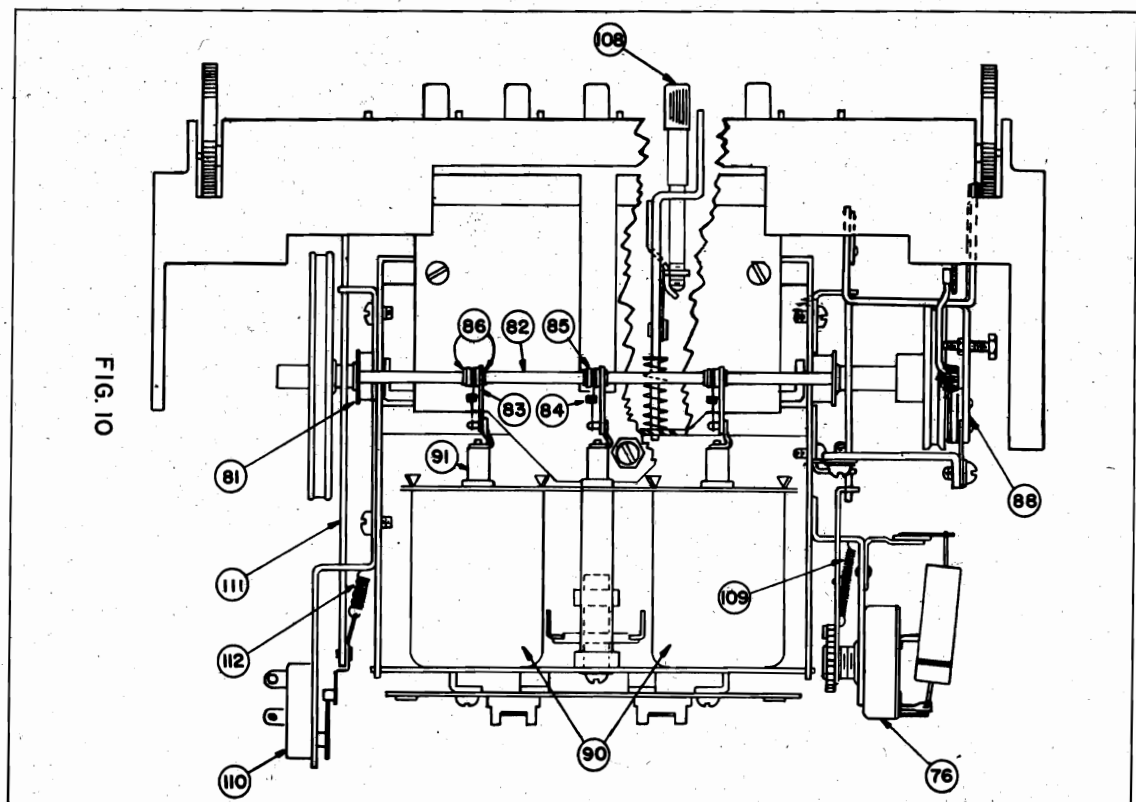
Parts Layout - Tuner Unit - Bottom View
